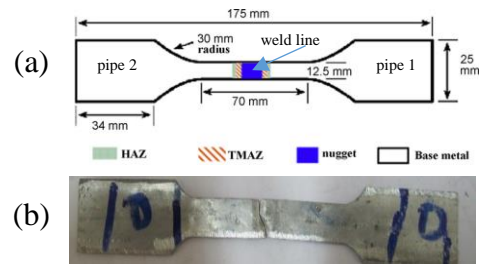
(a) Sample geometry of tensile test (b) A welded FSW sample
